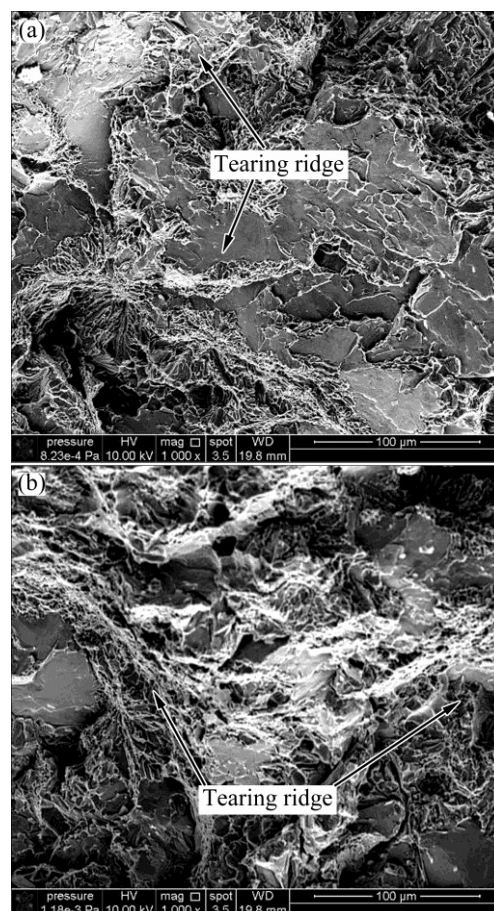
Typical SEM fractographs of permanent mold casting ADC12 alloy: (a) Liquid casting; (b) Rheo-casting
